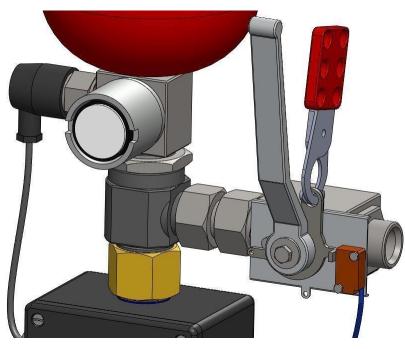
HRD bottle 5 L with OSHA mechanical blocking valve
